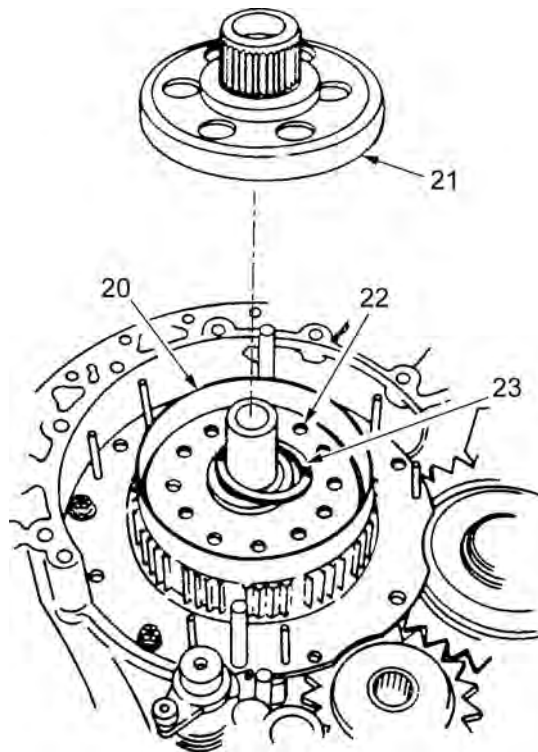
Steer Ring Gear Assembly and Related Parts Removal.
